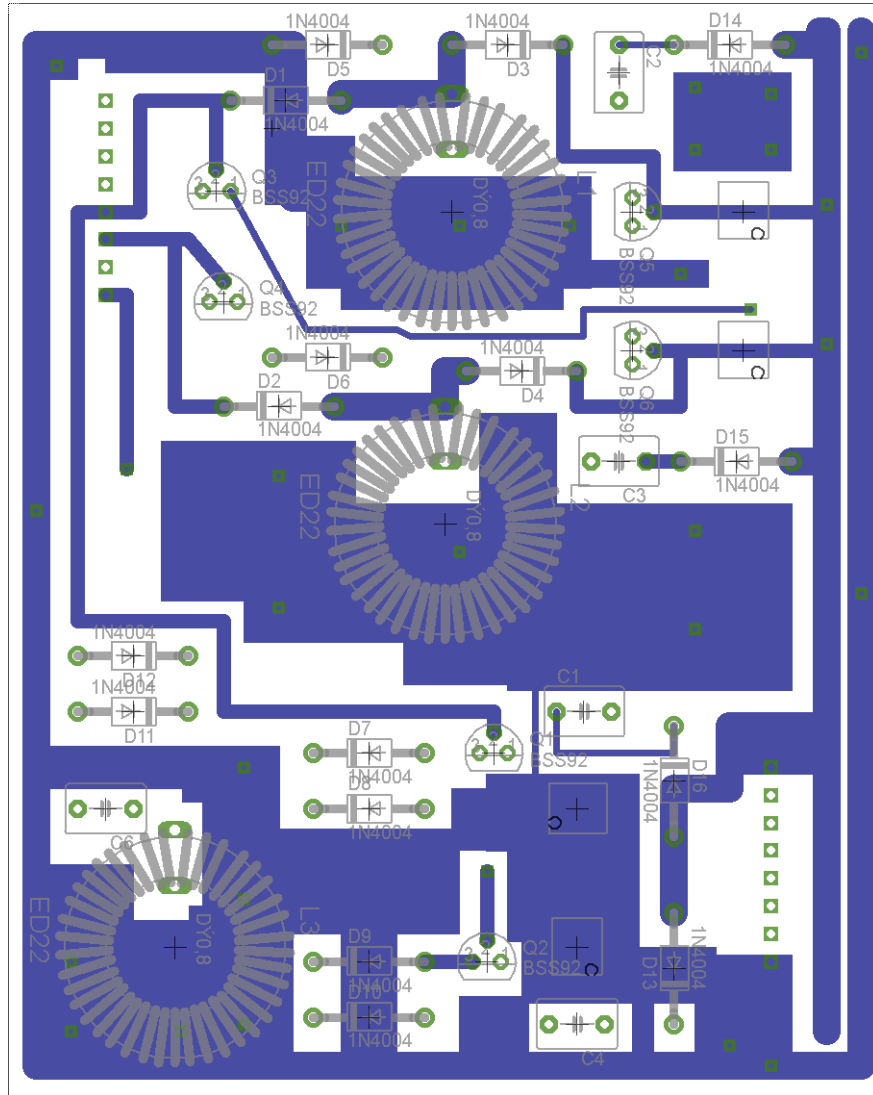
Reverse of PCB layout for first embodiment of Pre-Biasing Circuit, designed using CadSoft EAGLE Version 5.6.0.
